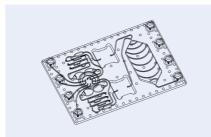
Schematic drawing of multifunctional sensor platform II - Fluidic 953
